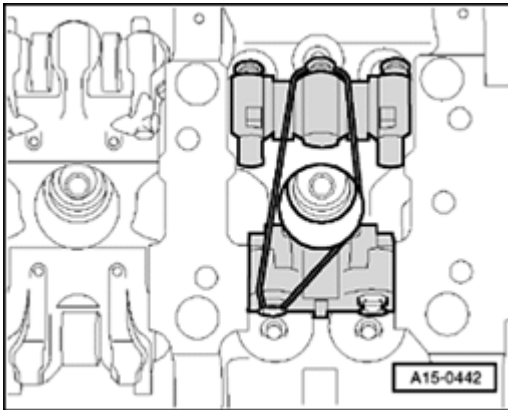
Turning Roller Rocker Lever Upward And Securing With A Rubber Band
